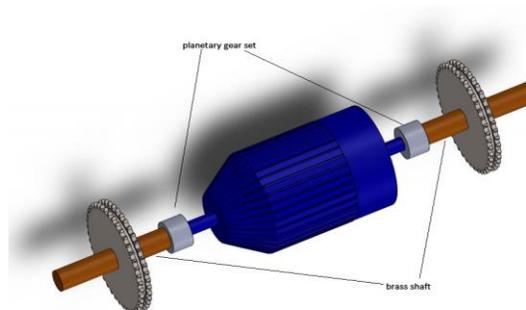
Rear axle comprising of motor connected to two brass shafts with sprockets.
